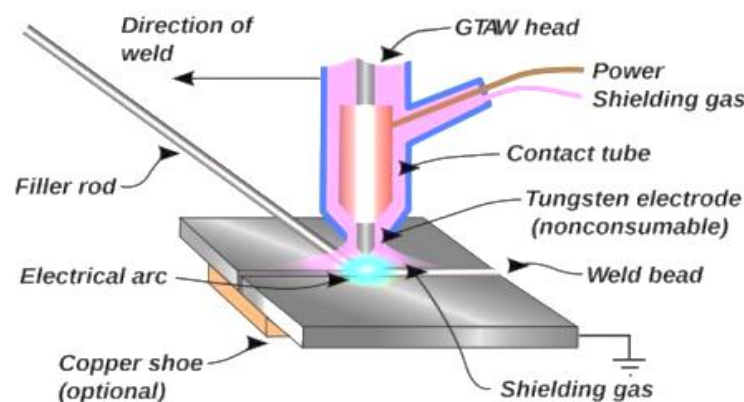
Principle of TIG Welding (R. Kumar et al., 2017)
